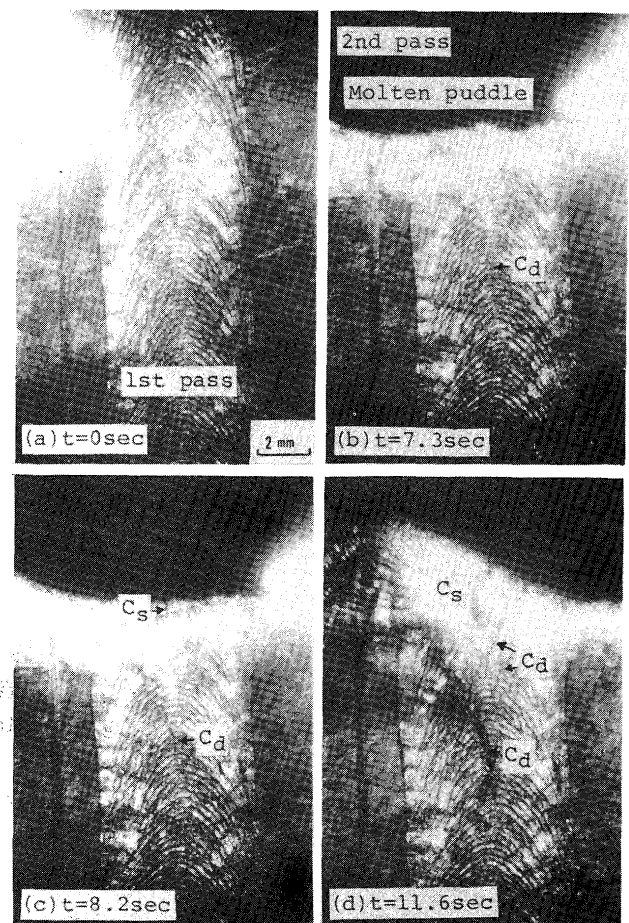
An example of sequence of films by the MISO technique coupled with the Cross-bead tensile hot cracking test (Item No. of specimen: 12, C_d : ductility-dip crack, C_s : solidification crack).
